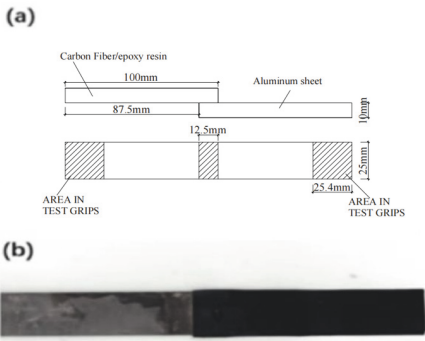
(a) Peel test specimen size; (b) Actual peel test specimens
